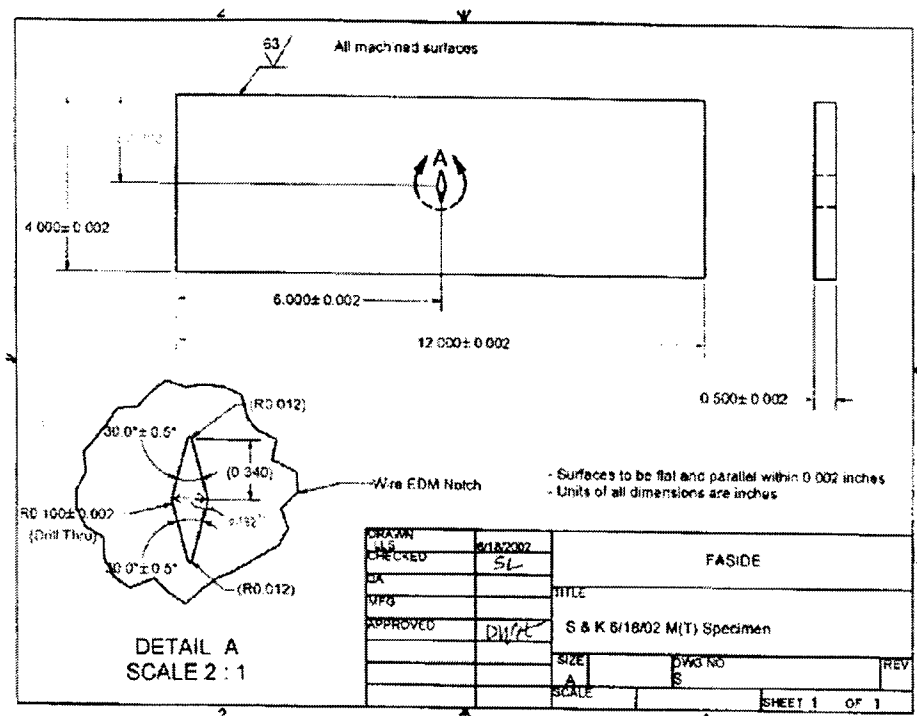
Wide 7075-T651 specimens with diamond-shaped EDM notch, designed by SKT
